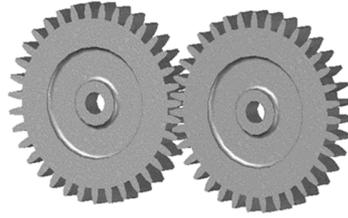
Counter-rotating gears of red onion stem cutting machine
